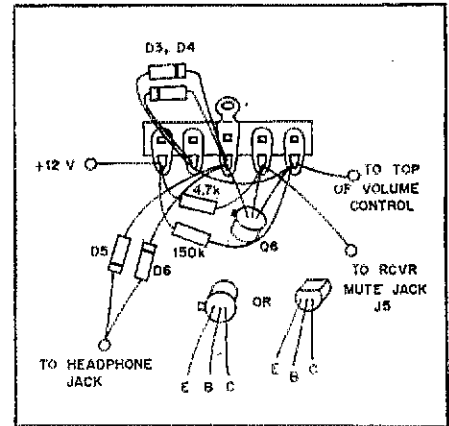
Parts placement of muting-switch circuit. Parts are mounted on a 5-lug solder terminal which is soldered to shield wall inside receiver. See Fig. 5.
